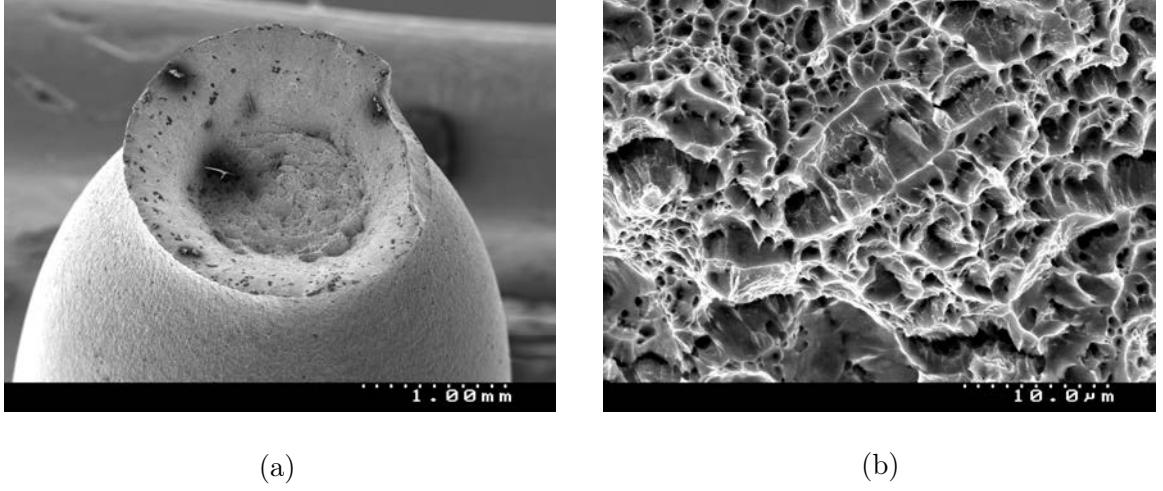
(a) Cup-and-cone feature of the fractured tensile specimen of unmodified 17-4 PH (H1150D); (b) Morphology of the fractured surface.
